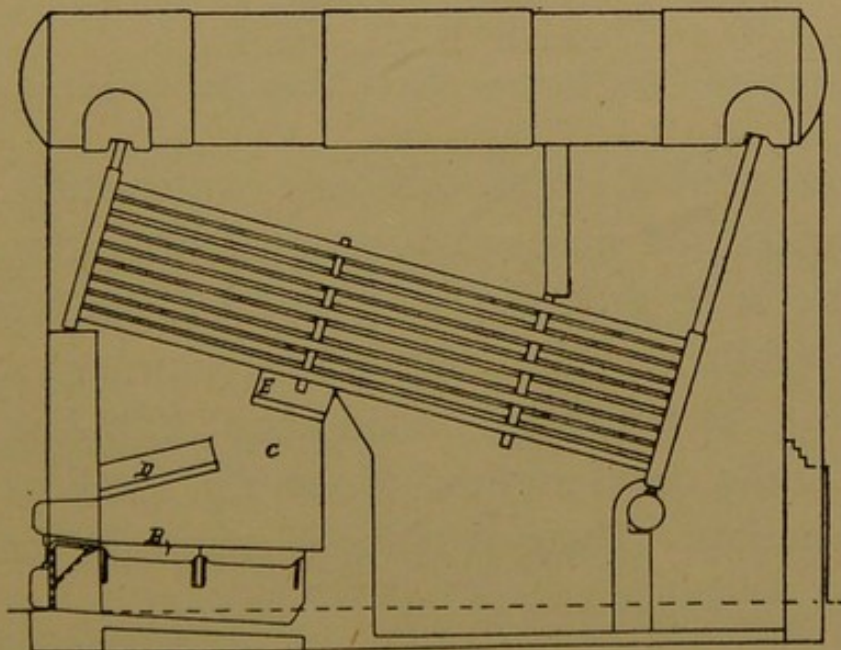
THE MILLER WATER-TUBE BOILER SETTING.
